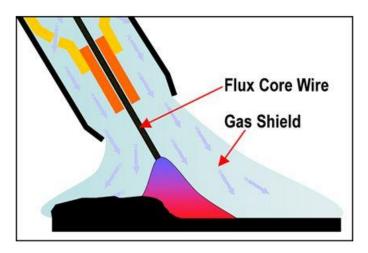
Flux-cored arc welding (FCAW or FCA)
